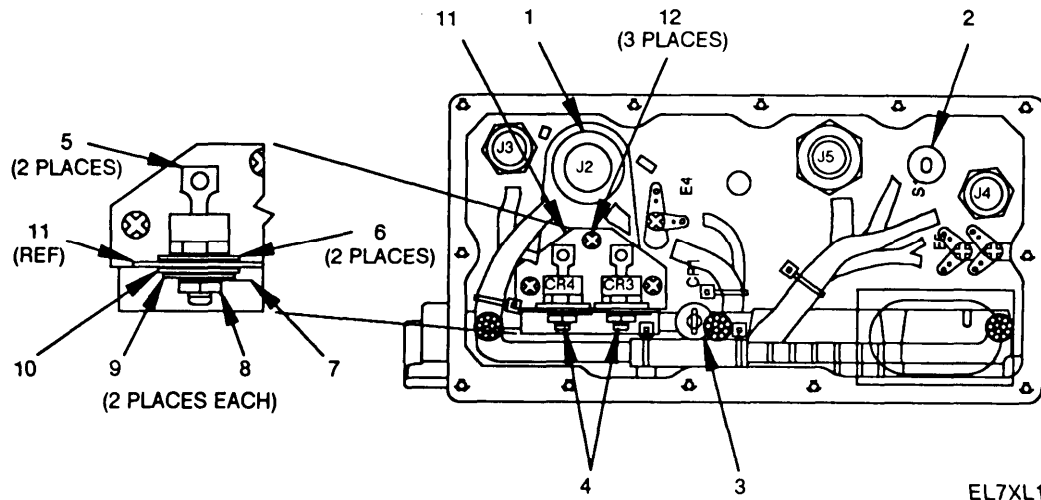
Power Supply Adapter (Rear View) Without Rear Access Cover.
